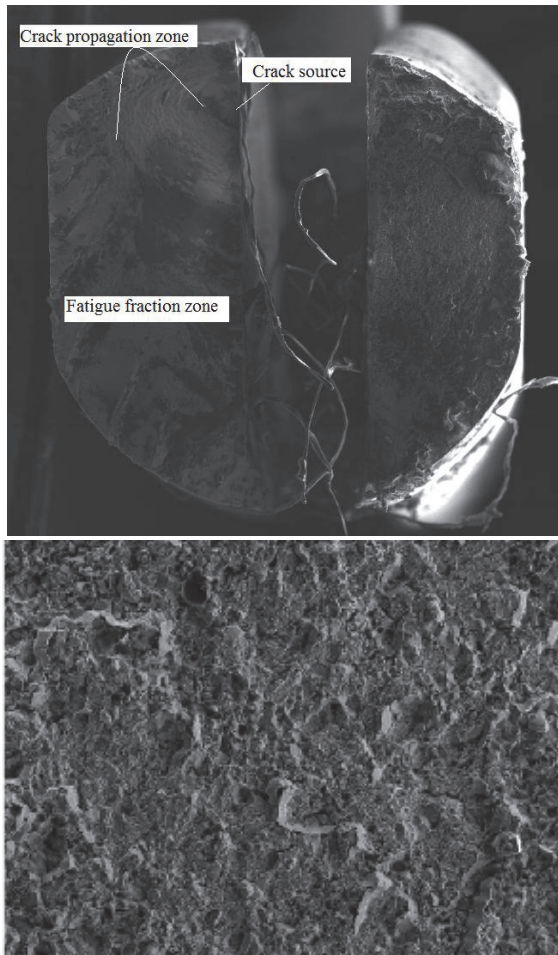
A-10x-Fracture needle rivet cross sectional view 13.492.242 courses B- 1000x-Enlarge image of dimples
